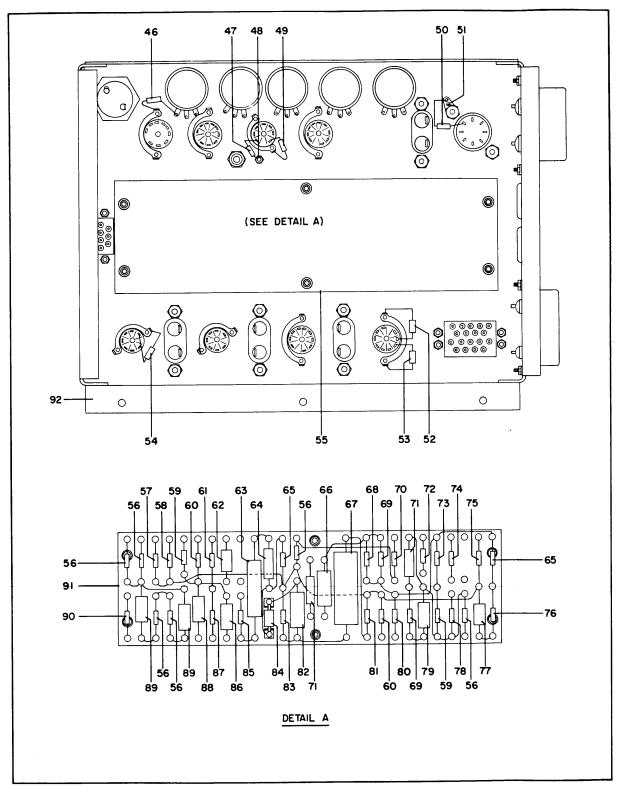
Video Chassis and Potentiometer Assembly, Bottom View (Sheet 2 of 2 Sheets), Index Nos. 46 through 92
